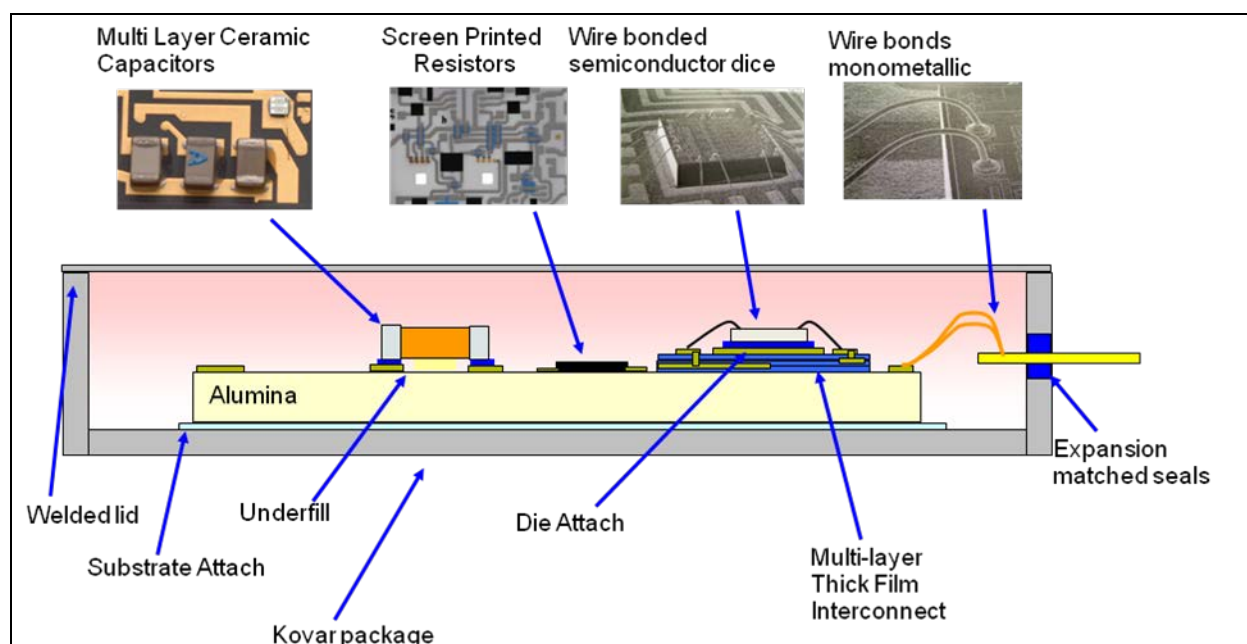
Typical MCM-C. Multi-Chip Module based on a thick film on ceramic substrate in a welded cavity package
